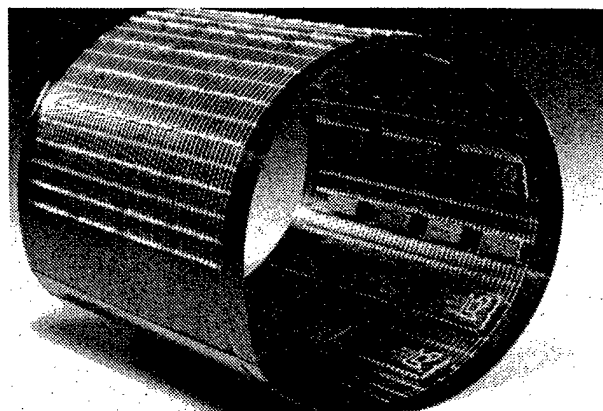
CYLINDRICAL CIRCUIT BOARD WITH MULTI-LEAD COMPONENTS
